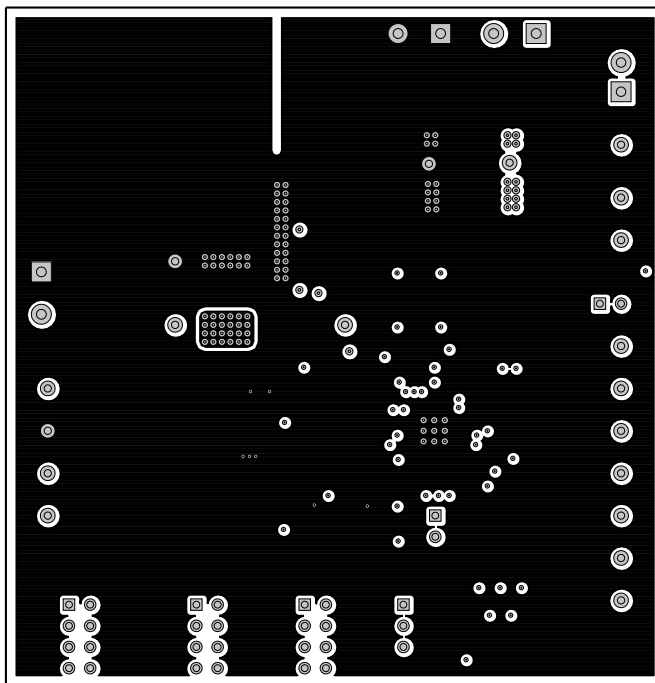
TPS51513EVM-549 Bottom Assembly Drawing (Bottom View)
